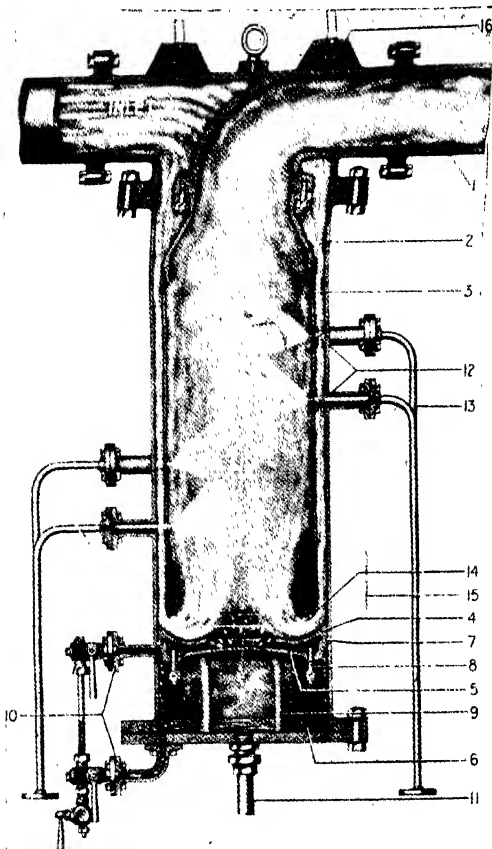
SECTIONAL VIEW OF THE HOPKINSON DESUPERHEATER
